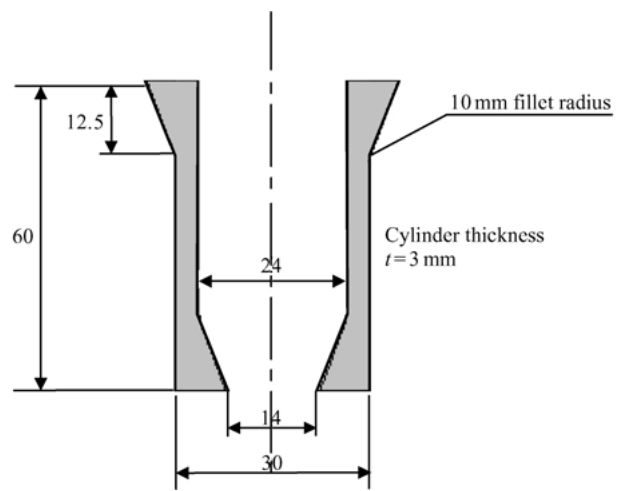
Cross section of a molded multi-axial bone cement specimen. All dimensions are in millimeters.
